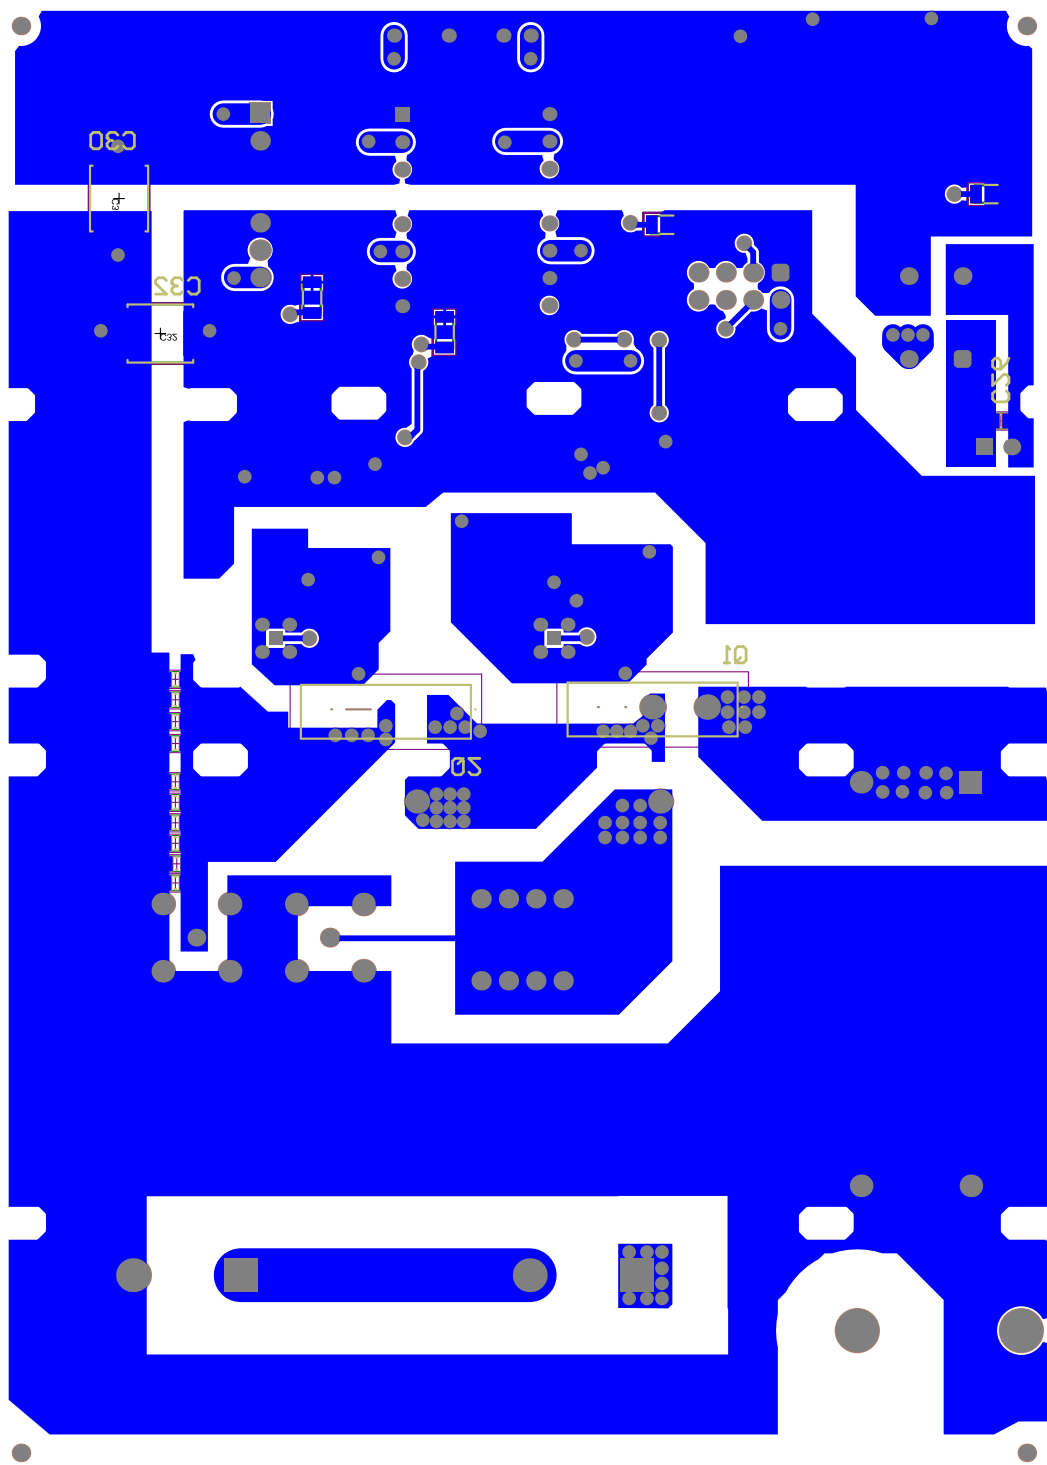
PCB "Eco2" with a 50% hole-based perforation strategy, bottom side.
